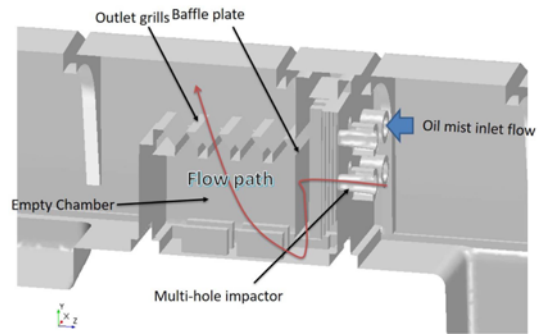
Multi-impactor type oil separator implemented in the test engine head
